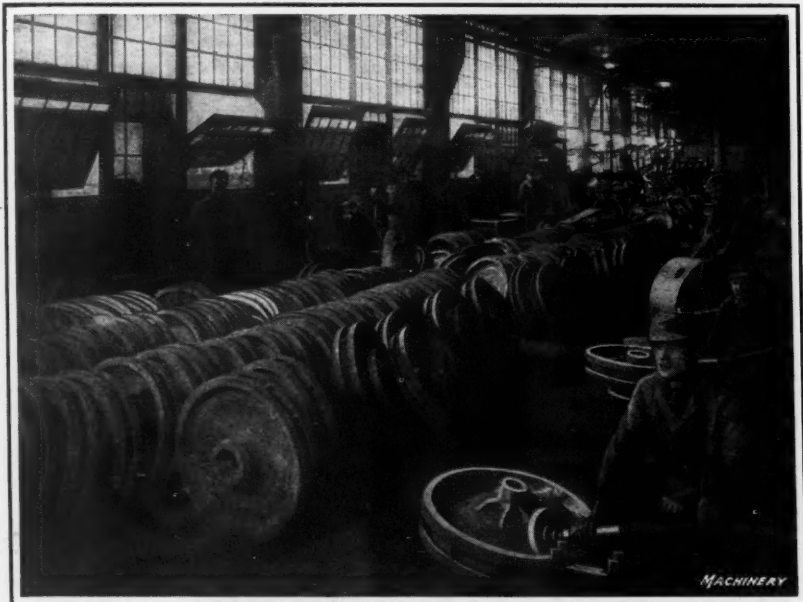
Grinding Department of the Foundry where Surface Defects are removed from Castings before machining
